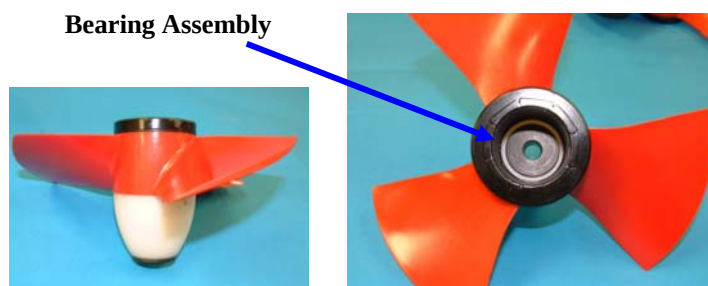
Enclosed Water Lubricated Bearing Assembly
